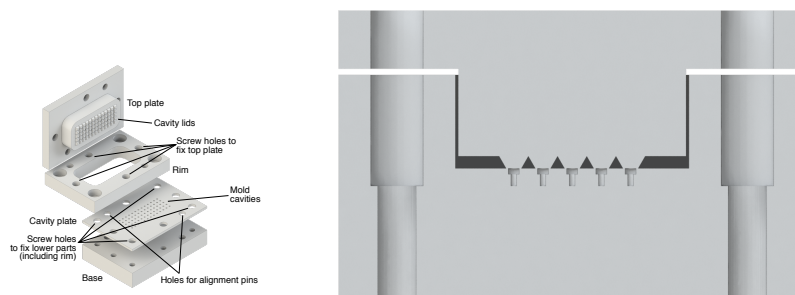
Left: Exploded view of the mold designed to form the prototype plugs from silicone potting compound. Right: Cross-section of the fully assembled mold.
